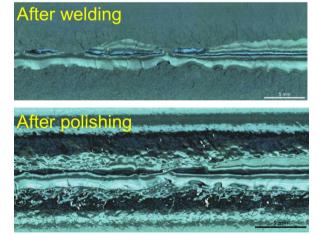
Optical images of the equator welding seam of the cavity CAV00518.
